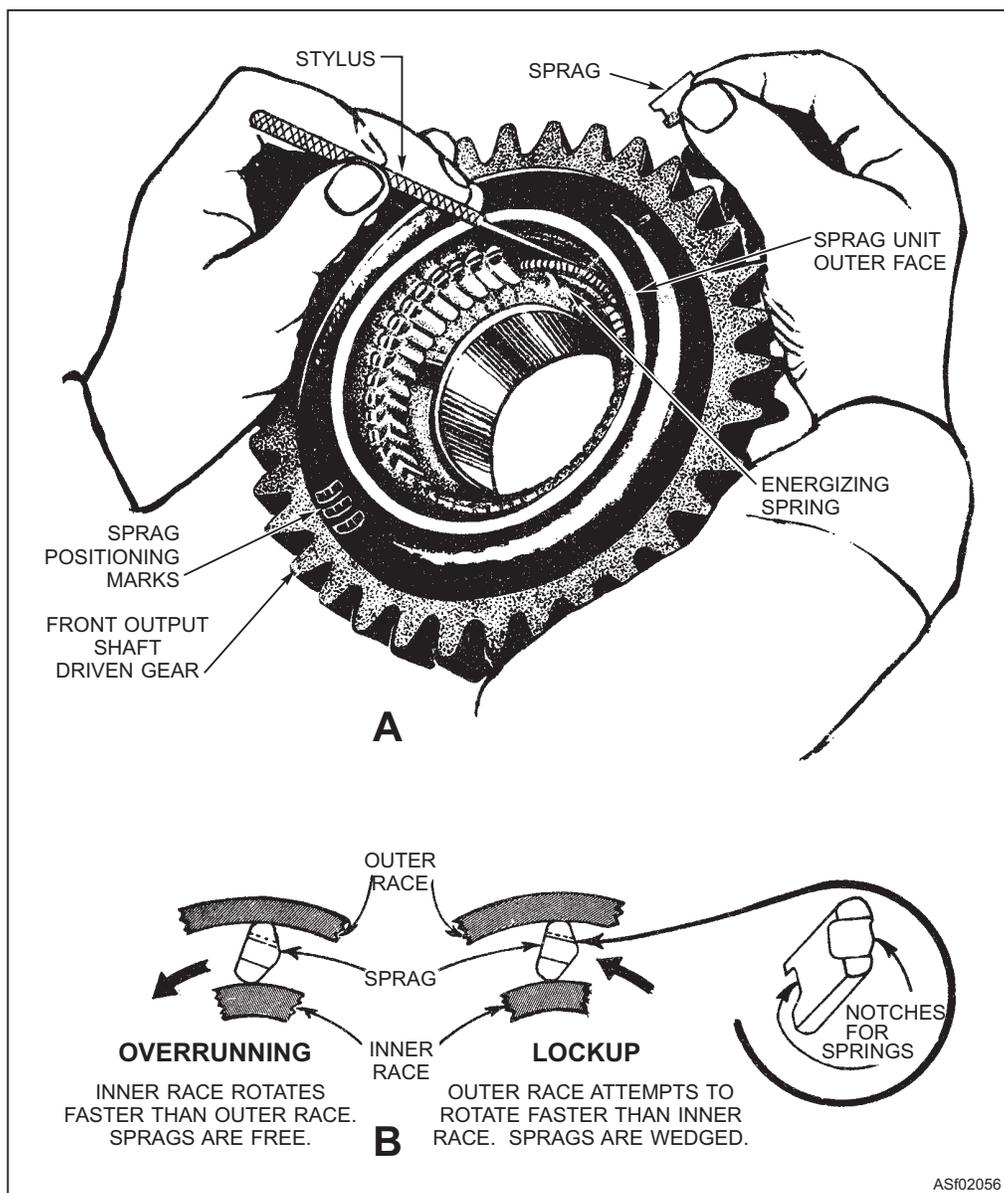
Typical sprag assembly, overrunning clutch.
